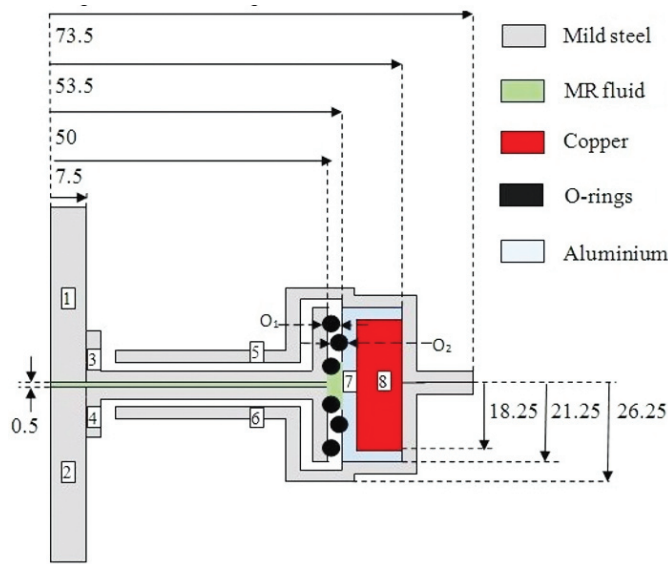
Schematic of the proposed MR clutch with dimensions (in mm).
